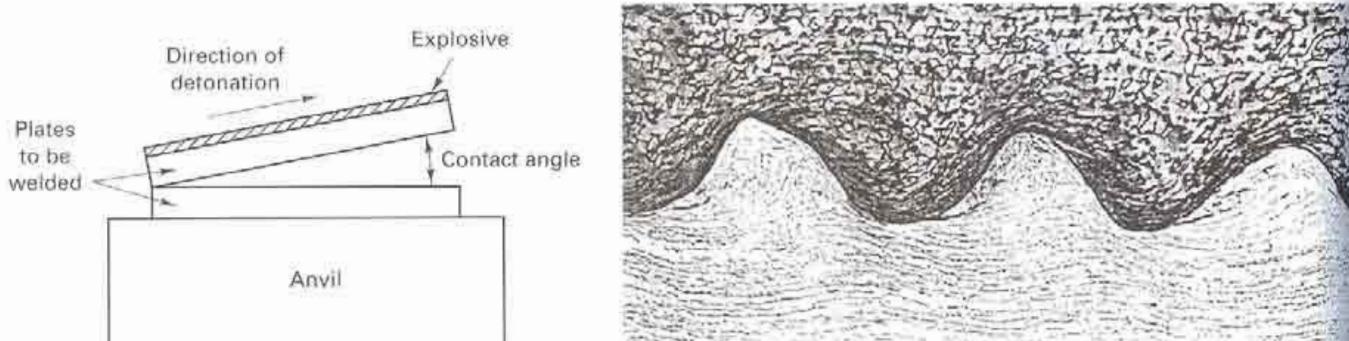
(Left) Schematic of the explosive welding process. (Right) Explosive weld between mild steel and stainless steel showing the characteristic wavy interface.
